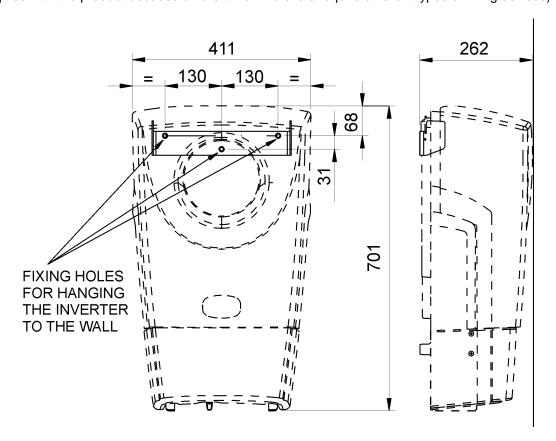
Detail of the SUNWAY M XS bracket with the fixing screws
